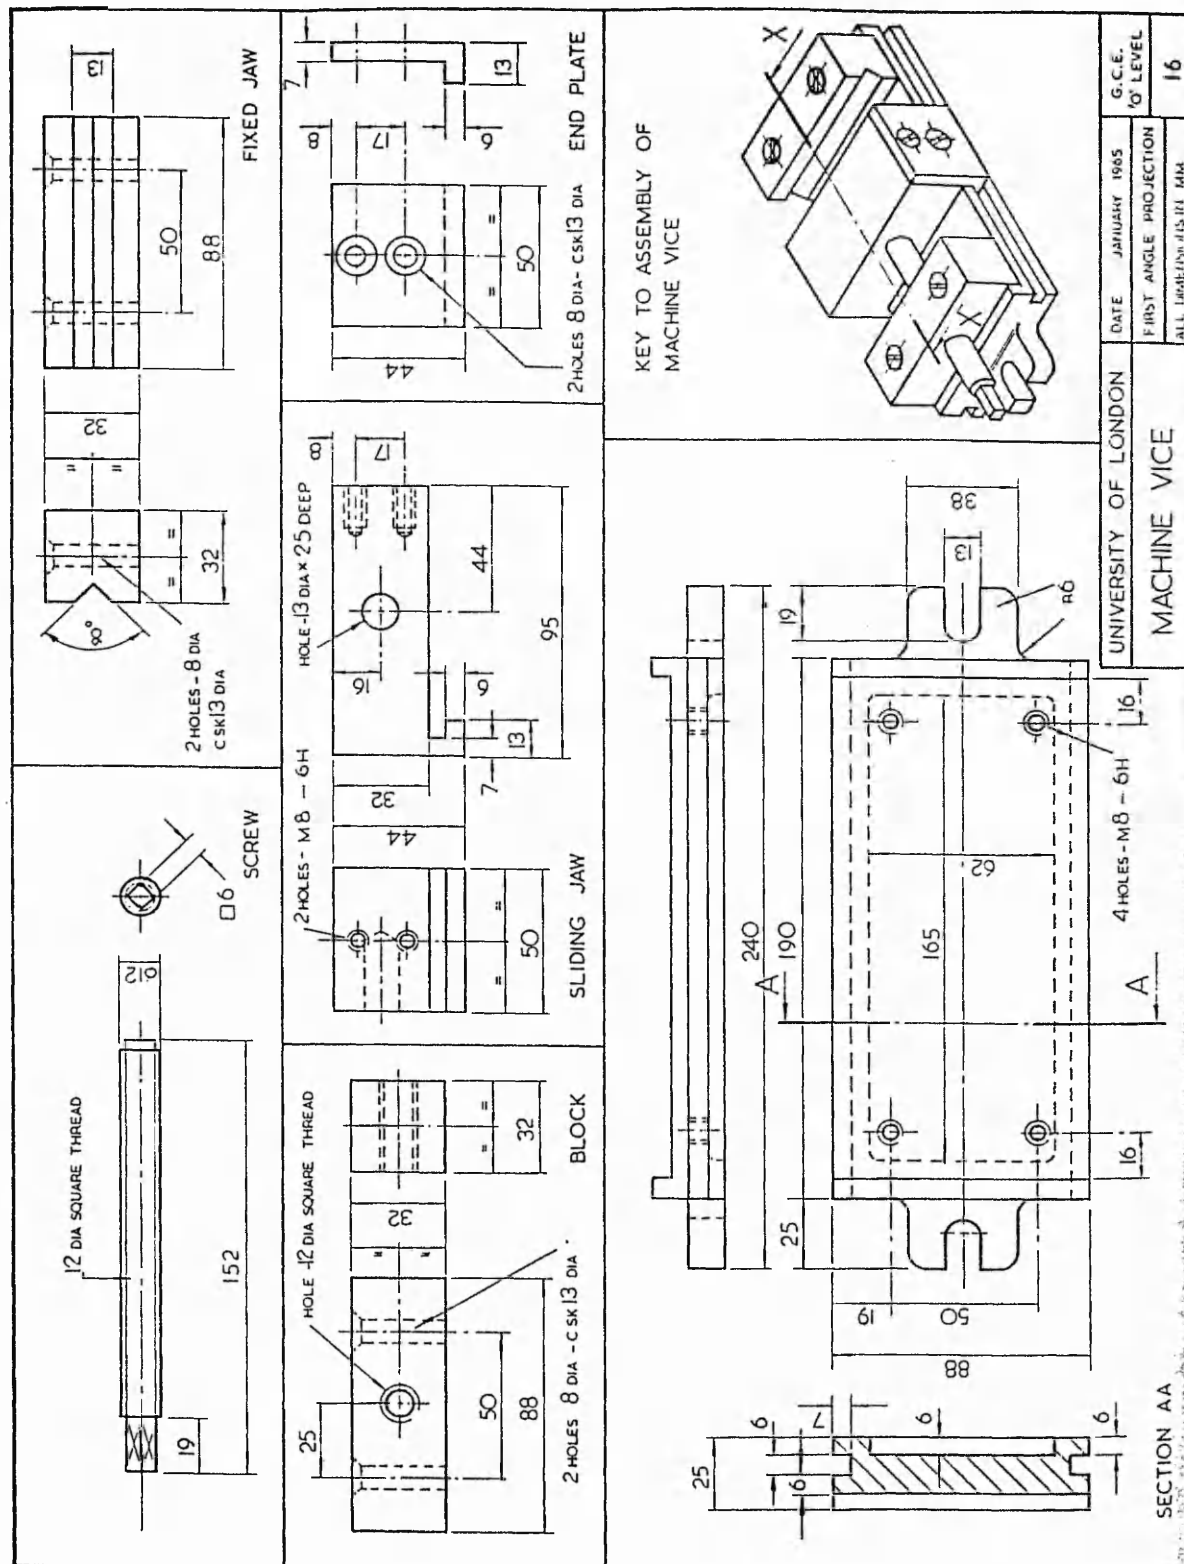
Example of Assembly drawing (taken from [Hart75]).
